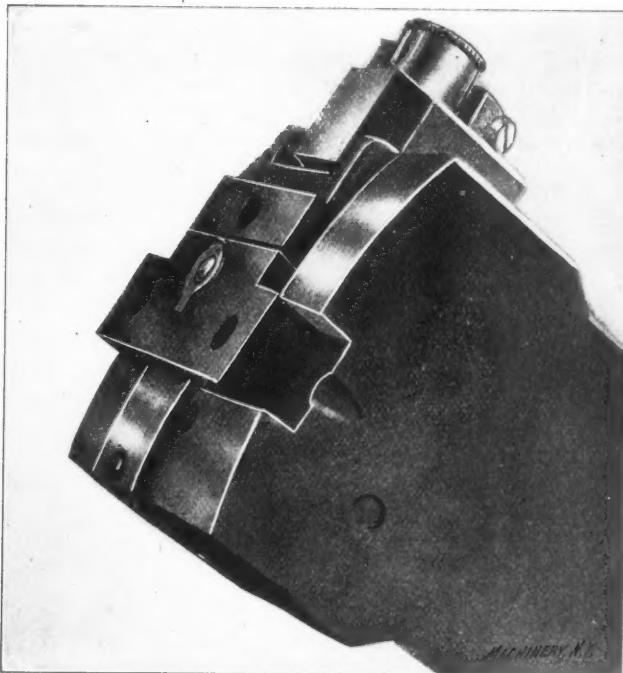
One Head of Rolling Device, showing Construction of Work Holder.
